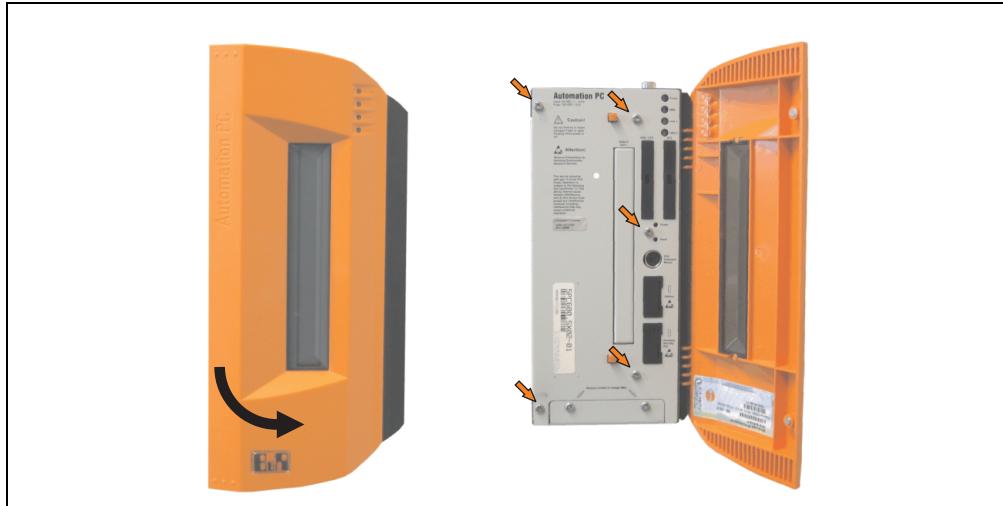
Mounting the side cover - APC620, 2 PCI slot
